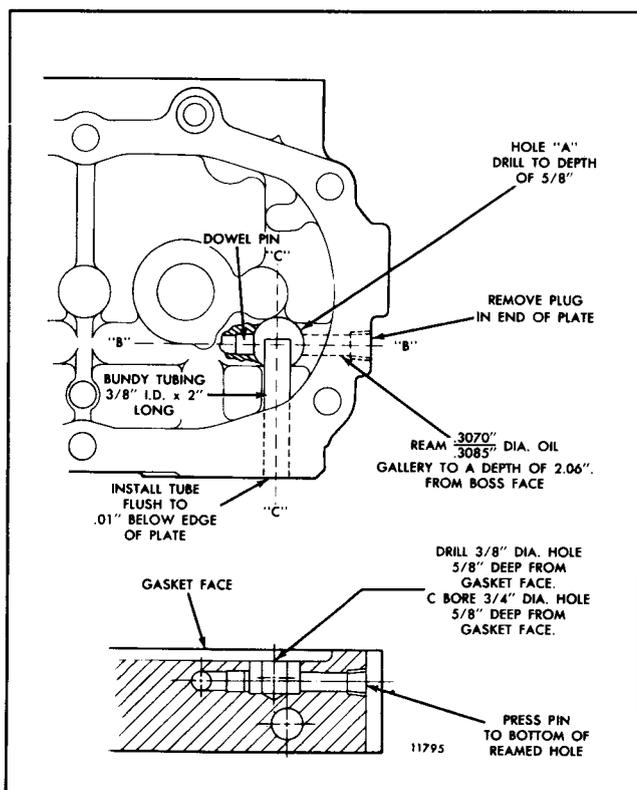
Dimensions for Reworking Front End Plate (6V-53 Engine)
